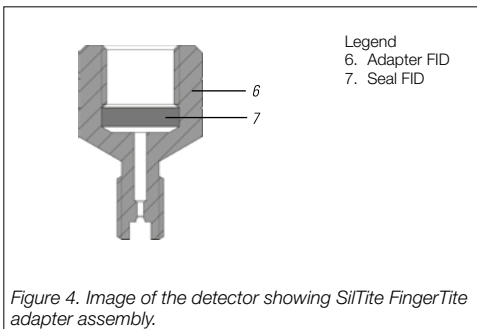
Image of the detector showing SiITite FingerTite adapter assembly.
